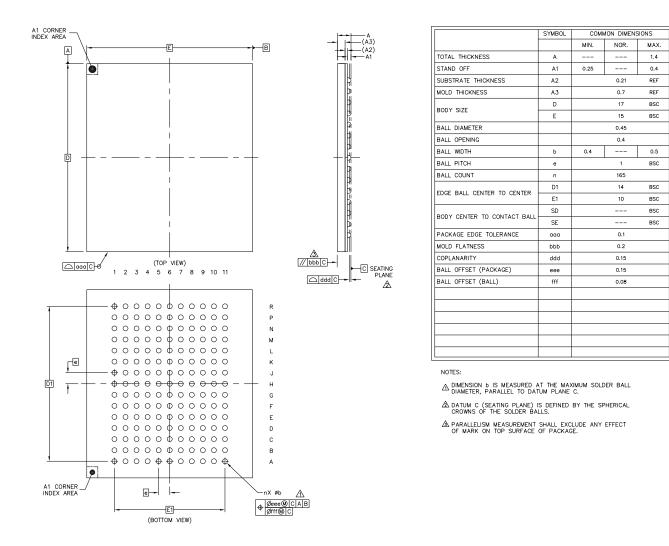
165-ball FBGA (15 x 17 x 1.40 mm) (0.45 Ball Diameter) Package Outline
